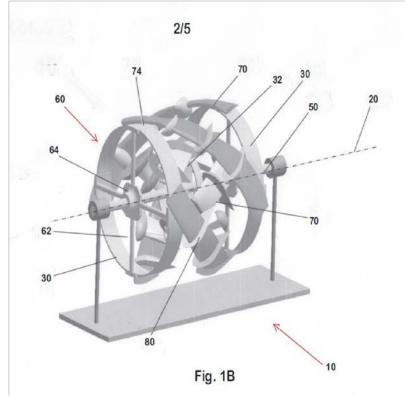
Suggested Axial Flow Helical Bladed Rotor As Shown in FIG 1b
